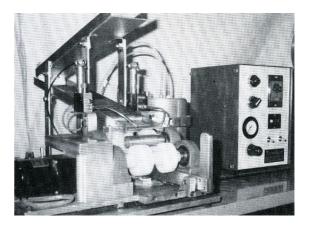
Example of application of sealant to outer circumferences of liners for coolant passages (System combining dispenser and film-forming rollers)
